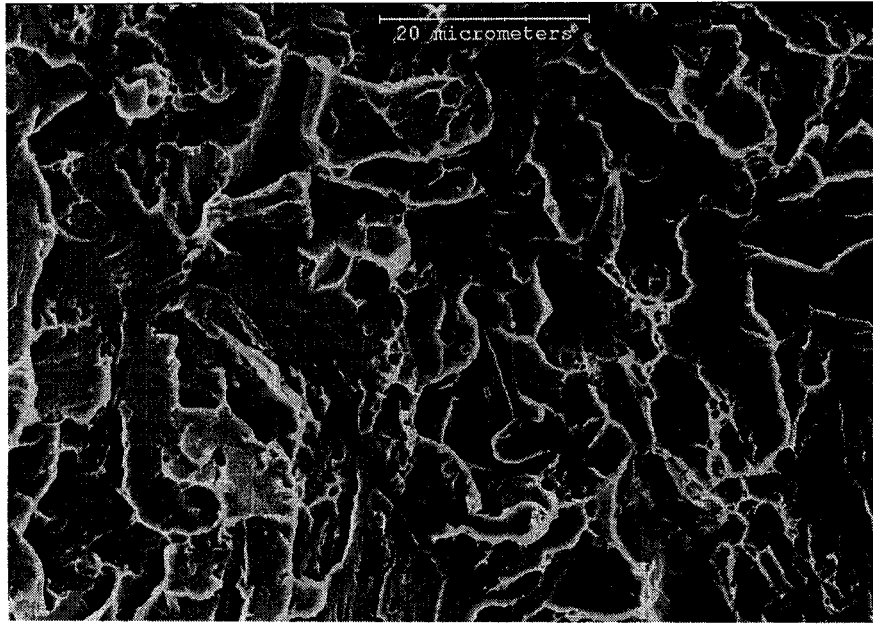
Cleavage and Microvoid Coalescence on Fracture Surface of Test Specimen T13-1
